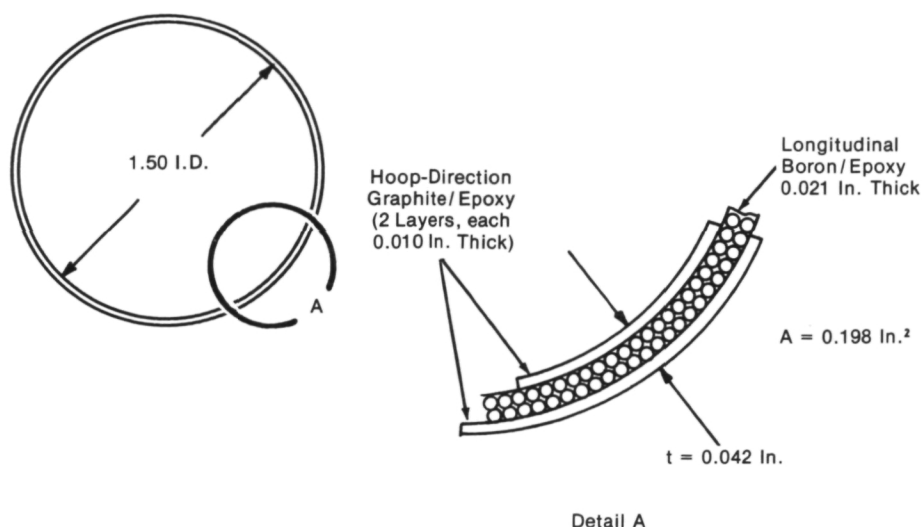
Cross Section of Drill Stem Showing Sandwich Construction
